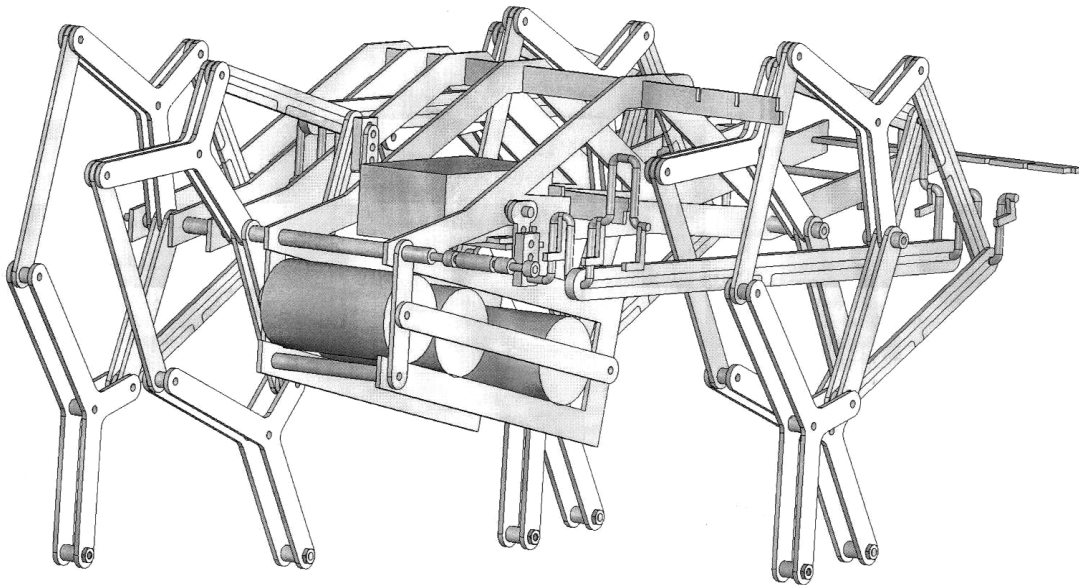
Final design with frame plates removed to show the one piece crankshafts.
